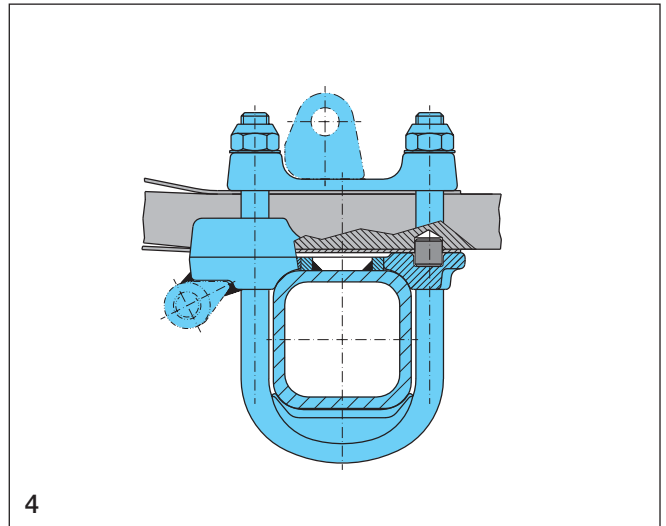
/ 4.2: Weld the tracking plate in place after aligning (see page 39).
